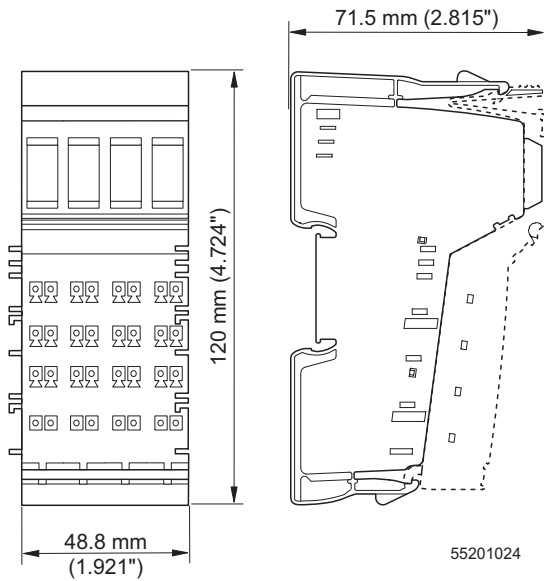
Dimensions of the electronics bases (8-slot housing)
